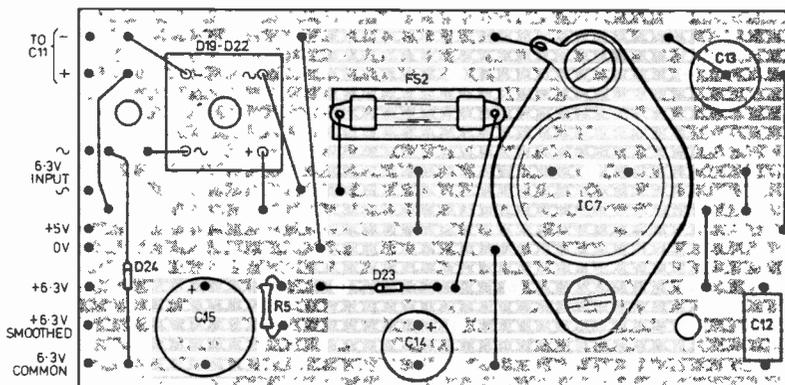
Power supply board layout. Nylon nuts and bolts should be used for mounting
